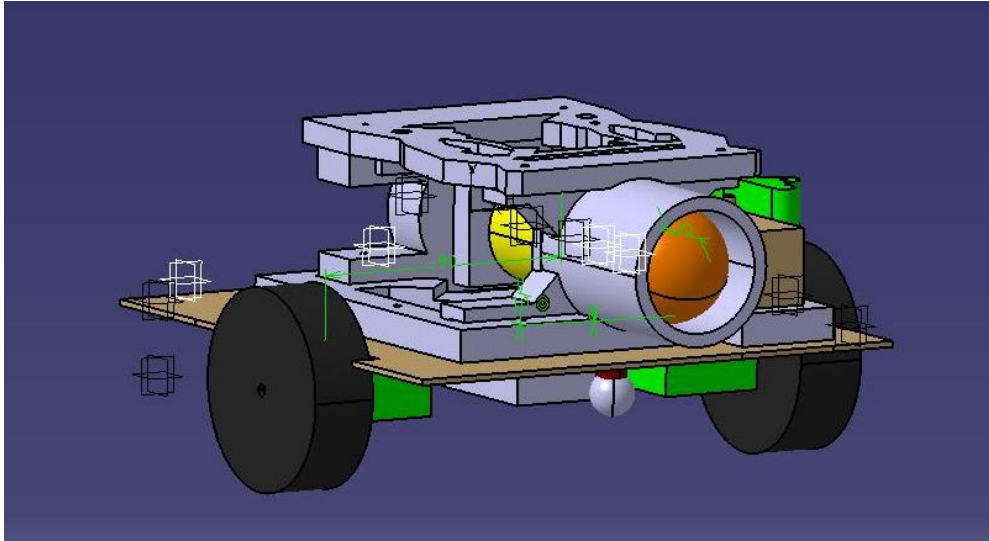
CAD Drawing Showing Redesigned Firing Mechanism
